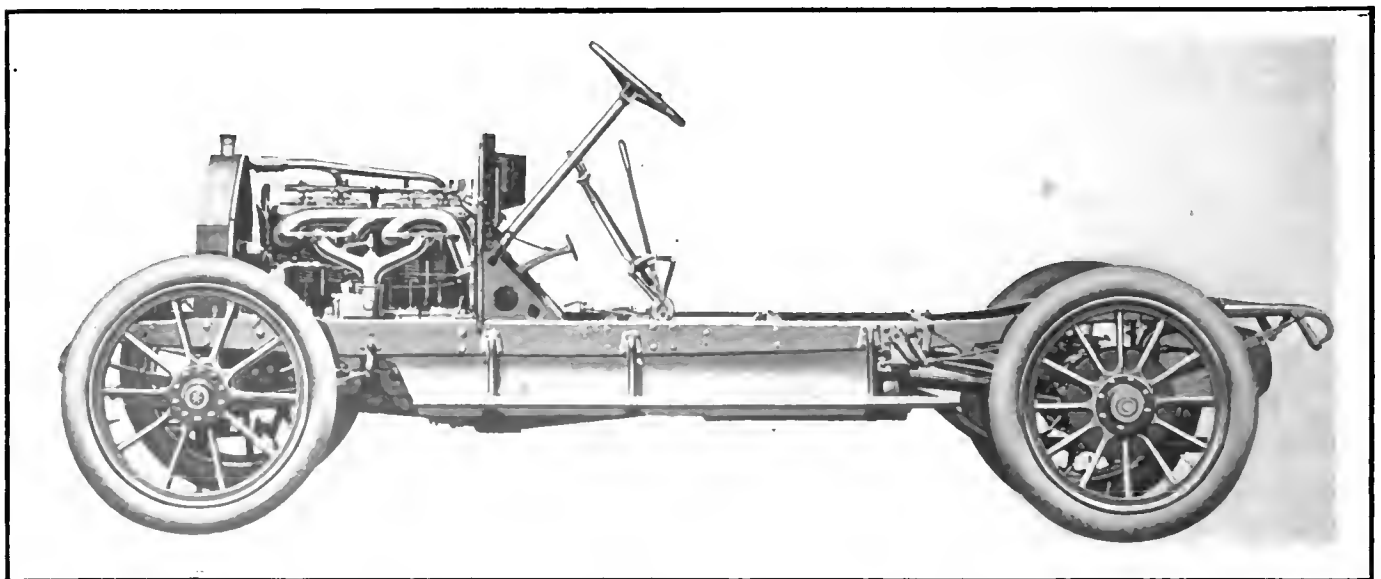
Model 30-60 chassis, showing half-elliptic spring suspension front and rear, long wheel base, and well designed chassis frame
